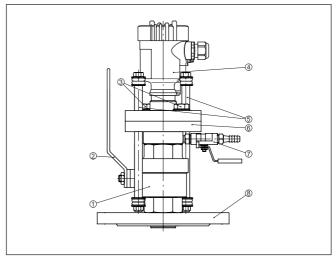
Ball valve fitting acc. to ZB 2553 with pressure transmitter VEGABAR 82
